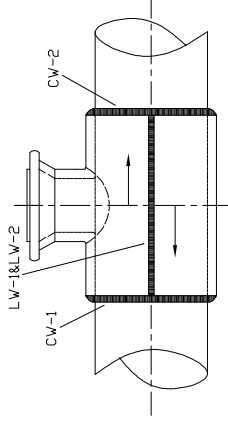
Encirclement Split Tee fitting welding sequence
